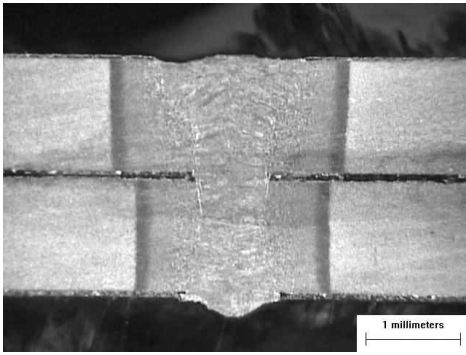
Cross section of lap joint welding of hot stamping steel by means of Nd:YAG laser
